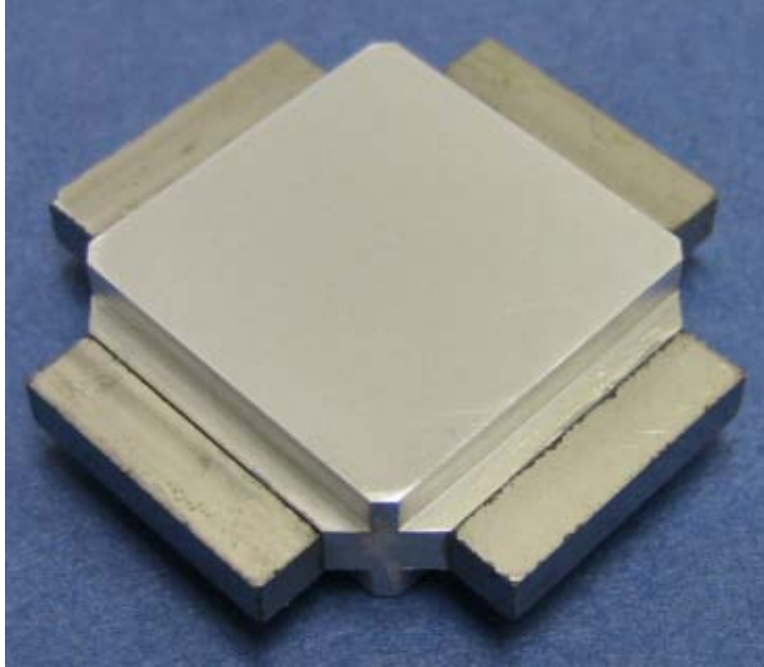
Fabricated AFSM mirror and armature assembly.
